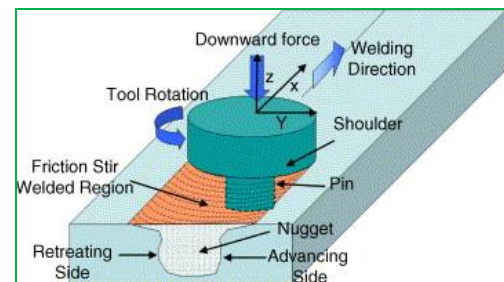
Schematic drawing of Friction Stir Welding process
